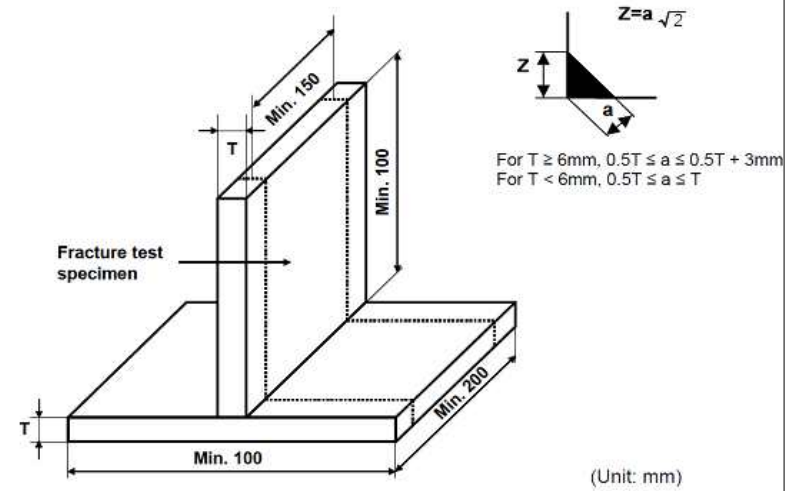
Dimensions and types of test assembly for fillet welds
